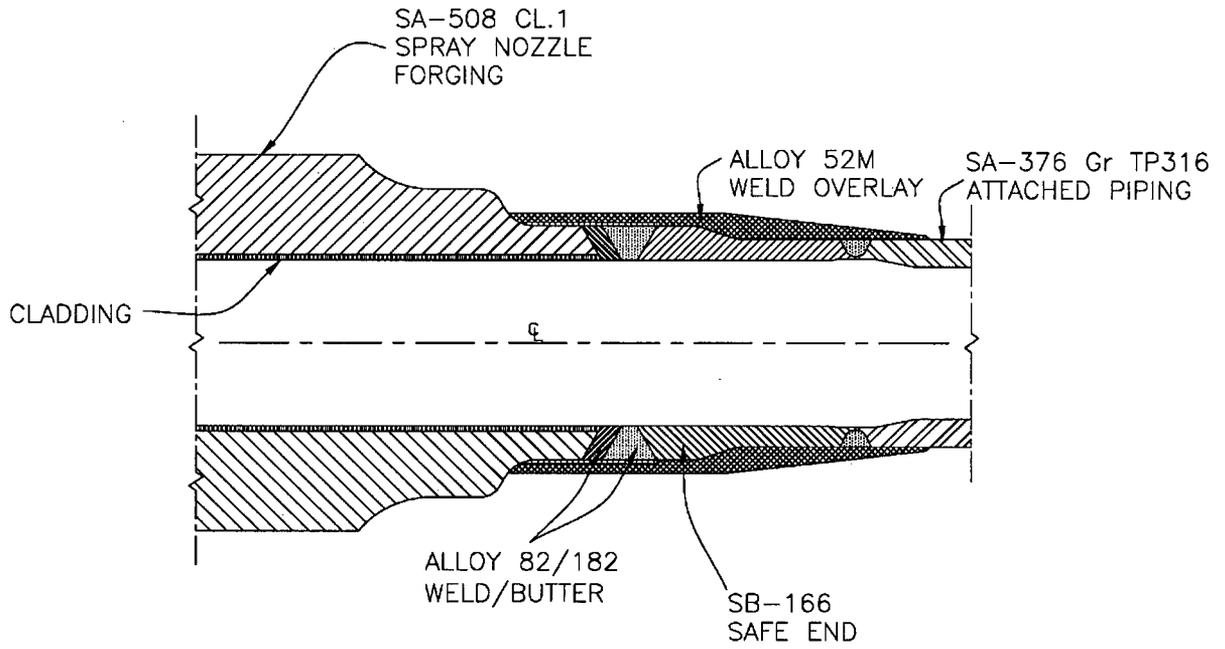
Pressurizer Spray Nozzle Weld Overlay (Typical)
